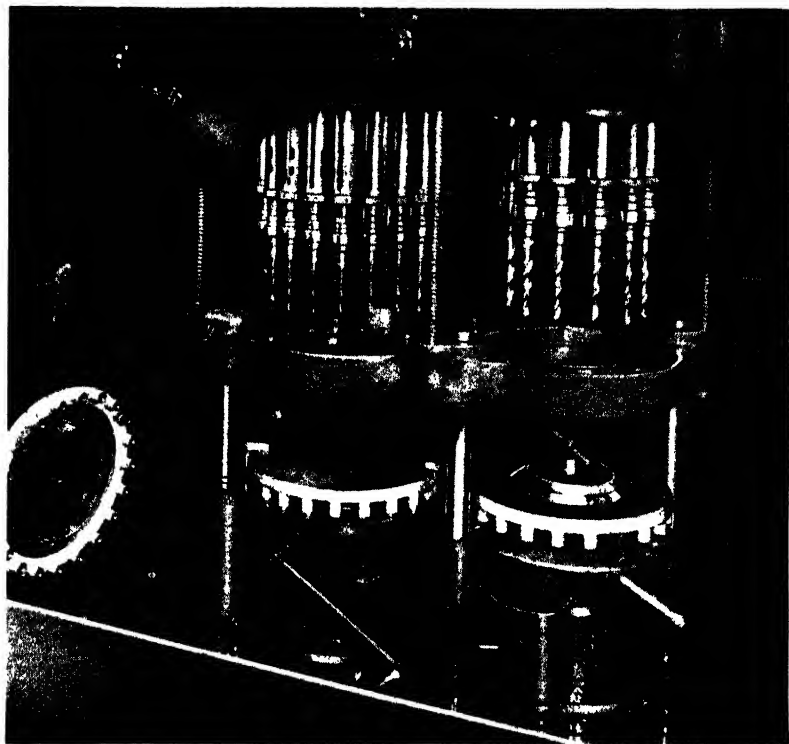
Spot-facing and Drilling Rocker-arm Covers and Cylinder Heads on Machine Equipped with an Indexing Fixture
